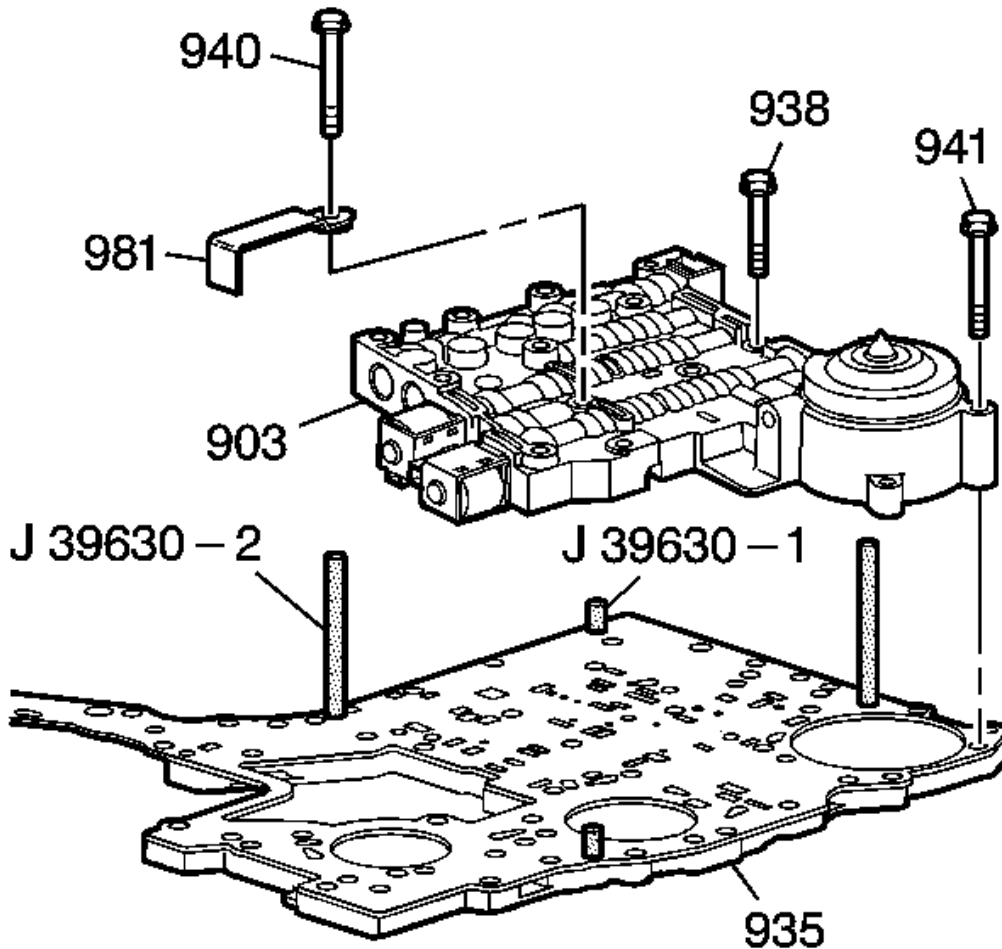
Identifying Lower Control Valve Body Over J 39630-2
